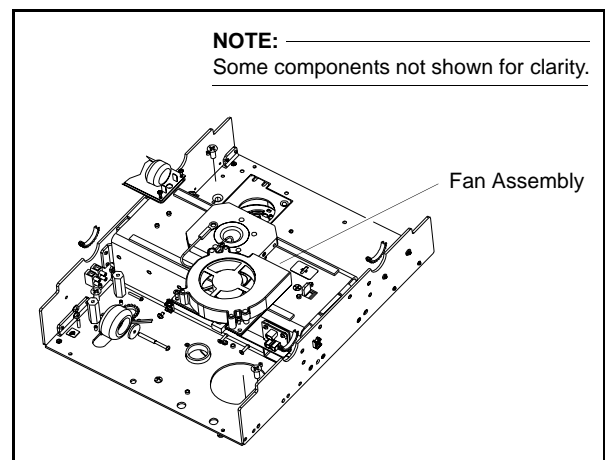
Upper Enclosure Fan Assembly Replacement
